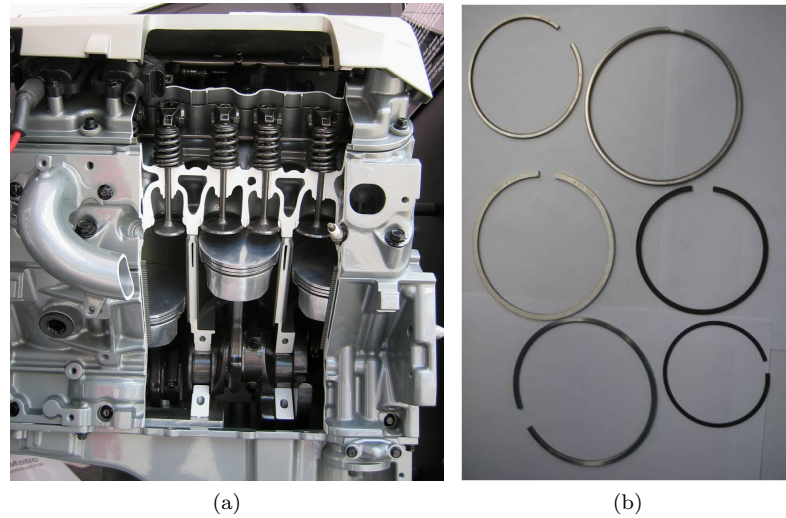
(a) Cutaway of an internal combustion engine showing the piston assembly [3] (b) Several piston rings.
